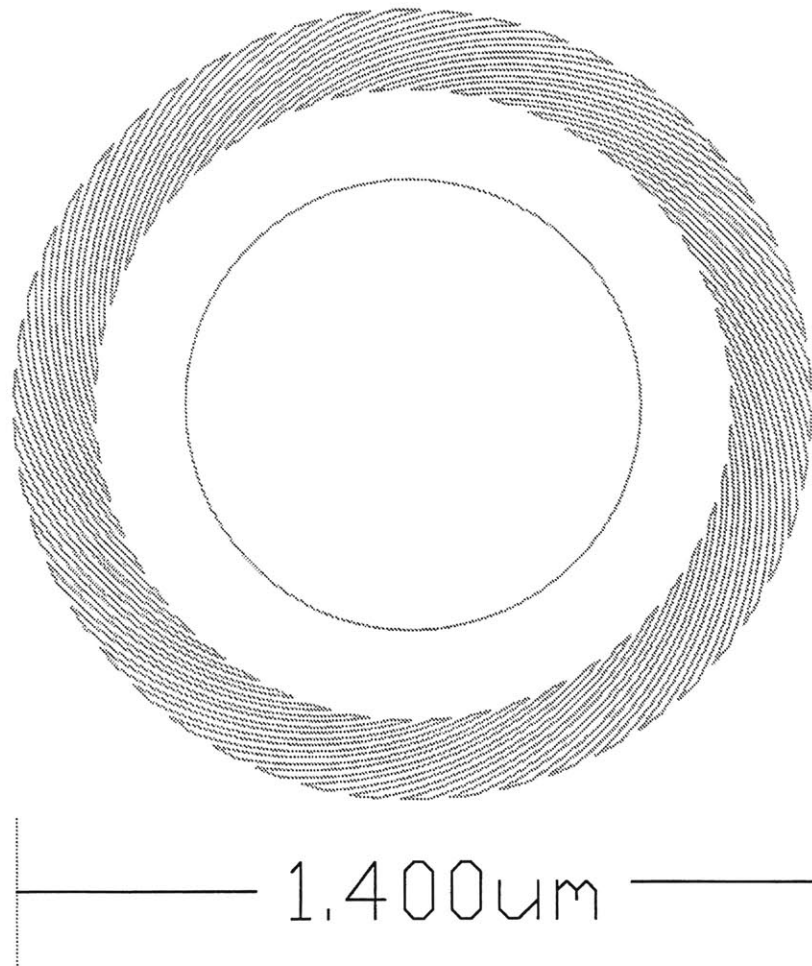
Sample mask drawing: D9-hd-spiralgrooves-df—Spiral groove bearings on the aft thrust bearing.
